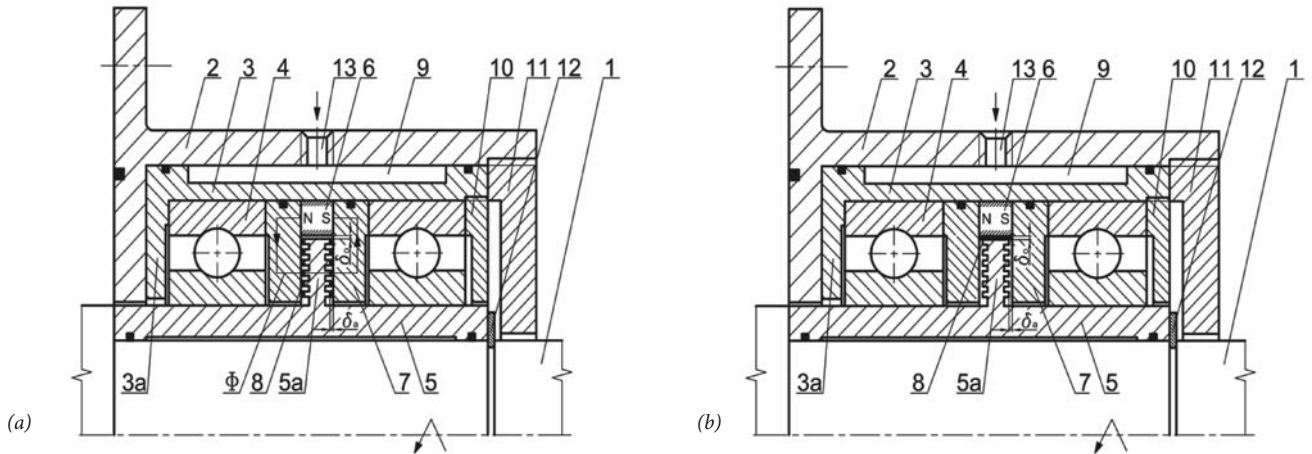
Feedthrough of high-speed shaft with magnetic fluid centrifugal seal (a) position of magnetic fluid at low rotating speed, (b) position of magnetic fluid at high rotating speed 1 – shaft, 2 – housing, 3 – stationary flanged sleeve, 3a – flange, 4 – rolling bearing, 5 – movable flanged sleeve, 5a – flange with sealing projections, 6 – cylindrical permanent magnet, 7 – pole piece, 8 – magnetic fluid, 9 – cooling chamber, 10, 11 – setting nuts, 12 – snap ring, 13 – hole for cooling medium, δ_a – axial sealing gap, δ_r – circumferential sealing gap, Φ – closed magnetic circuit
